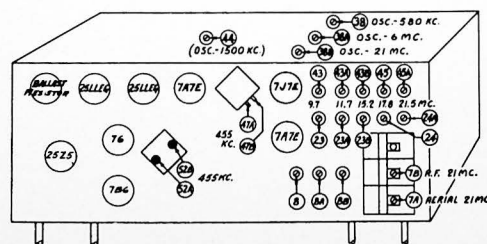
LOCATIONS OF COMPENSATORS—TOP CHASSIS Model 42-761
